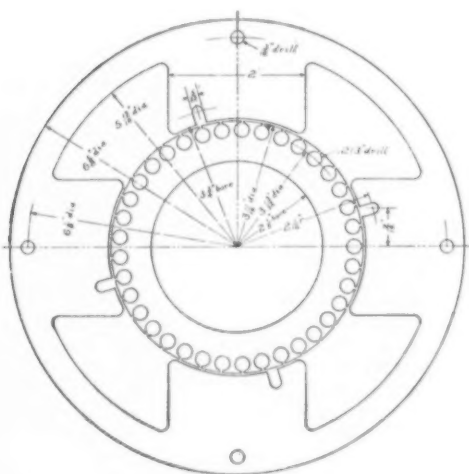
DETAILS OF STATOR AND ROTOR CORE PLATES.
